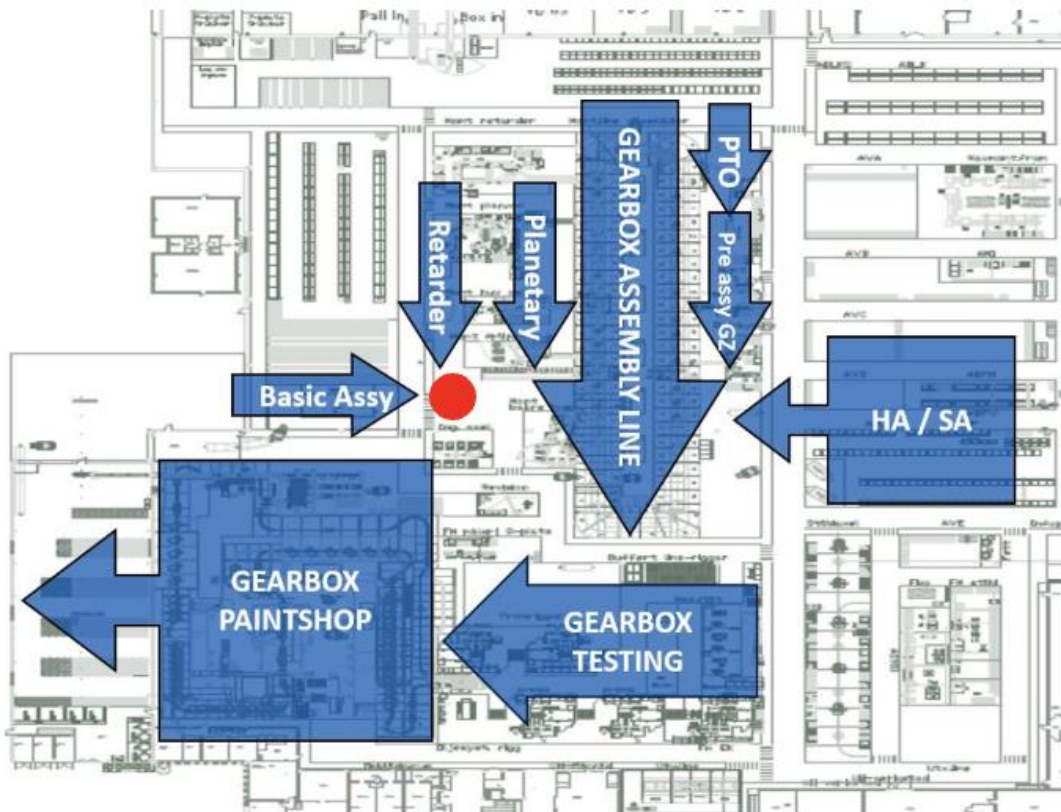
Layout of the gearbox assembly at DT. The red dot in the layout shows the location where the remanufactured gearbox entered the assembly line (courtesy: Scania).
